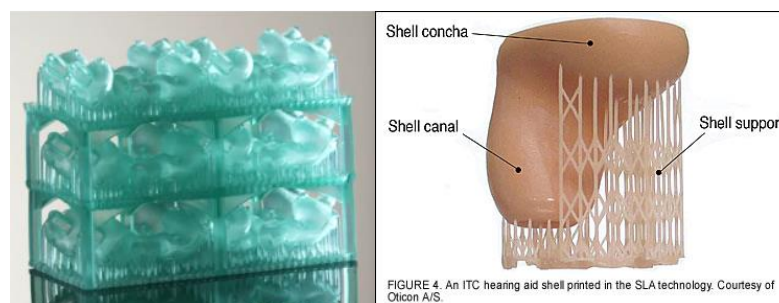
examples of how 3D printed products come out of the 3D printer
